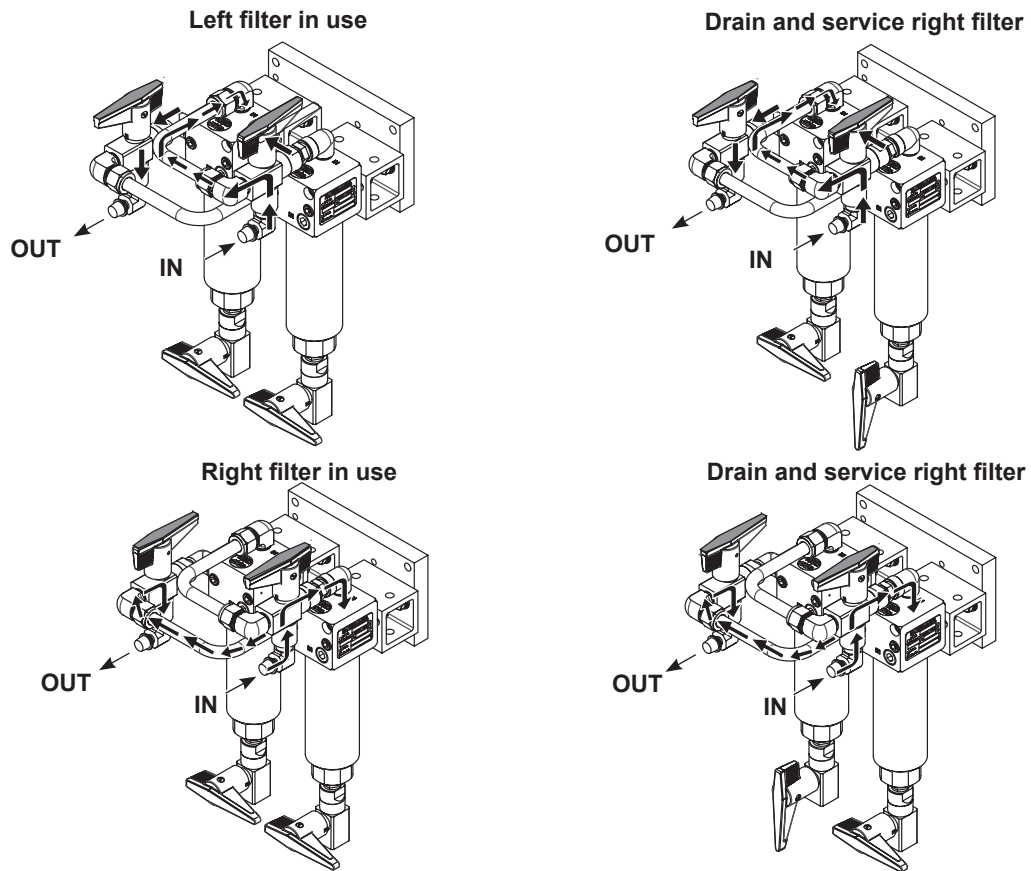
Handle Positions—Inverted Dual Filter Assembly with Three-Way Ball Valve – Narrow
